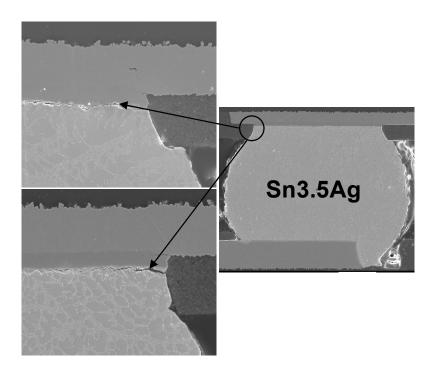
Failure Modes observed in SnAg Solder Joints
